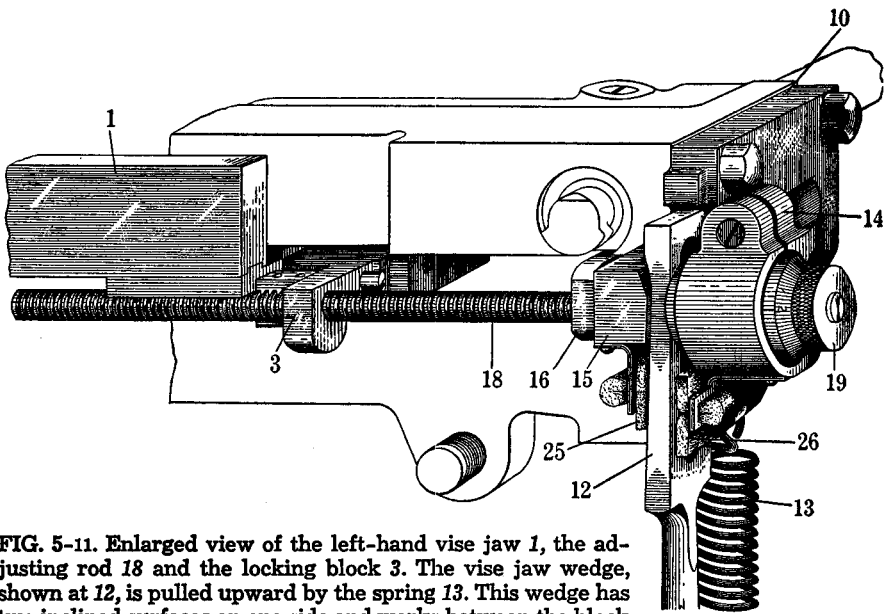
Enlarged view of the left-hand vise jaw 1, the adjusting rod 18 and the locking block 3. The vise jaw wedge, shown at 12, is pulled upward by the spring 13. This wedge has two inclined surfaces on one side and works between the block 15 and the end of the adjustable bushing 19 which is threaded in the bearing 14 on the vise frame. The actions of the short wedge and the long wedge surfaces are explained in detail in the text of this chapter.
